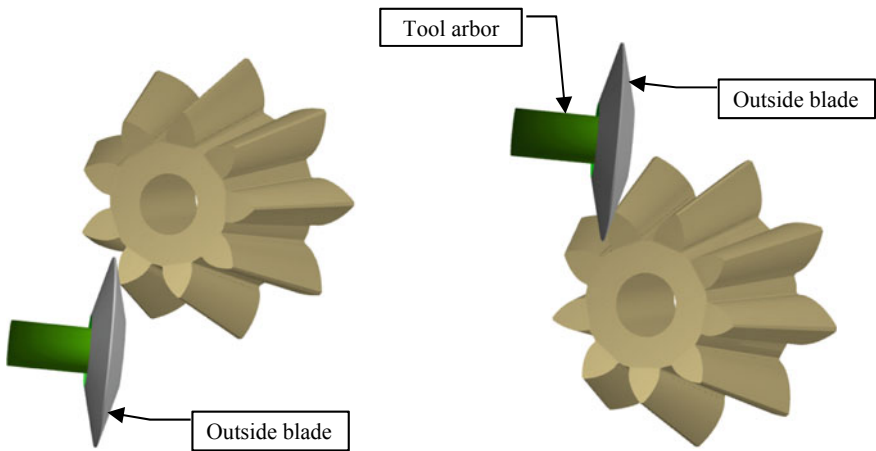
CoSIMT Toe chamfering both tooth flanks using the outside blade—straight bevel gear
